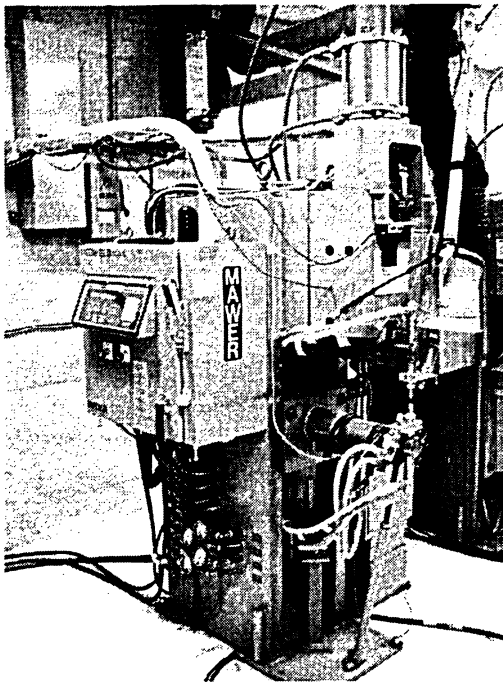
A 50 kVA AC spot welding machine.
